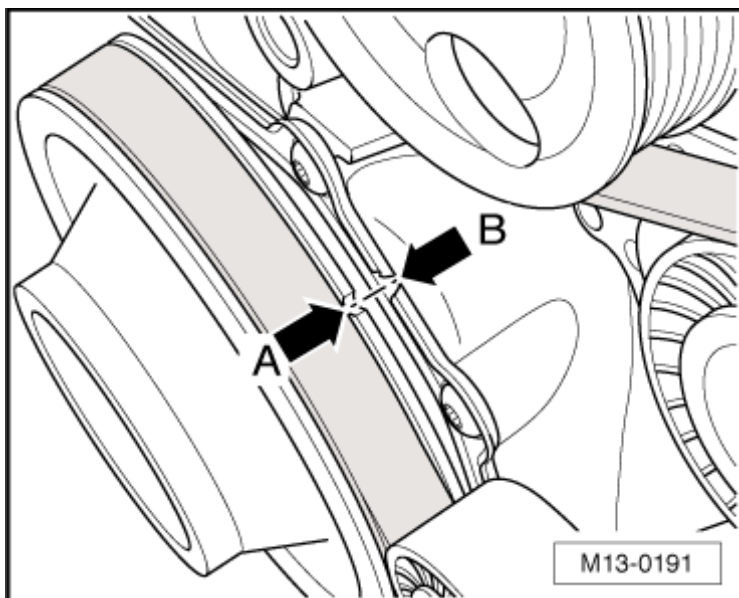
Identifying Belt Pulley And Sealing Flange At TDC
